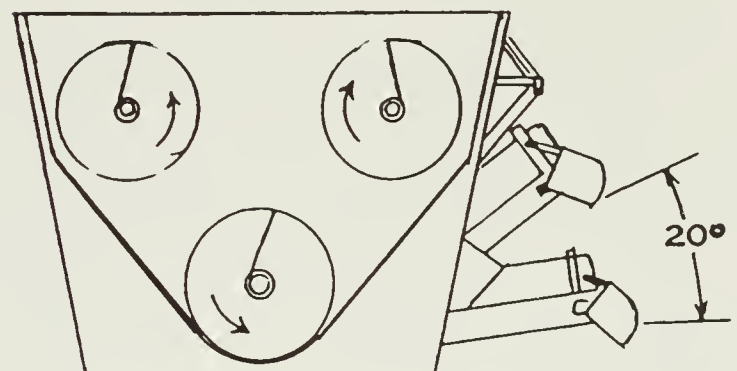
Cross section of a mobile mixer-feeder. Source: Henke Machine, Inc.
